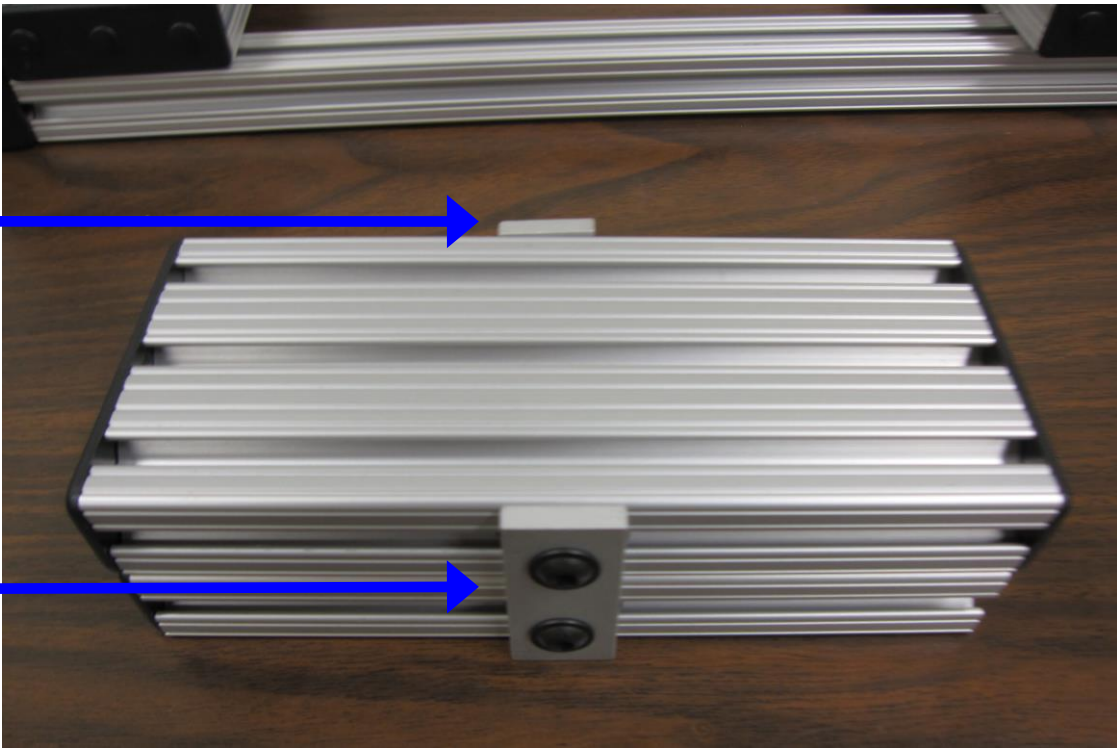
Aerial view of part “F3” labeling locations of the 2 Hole Joining strips and 1/4-20 x3/8 Flanged BHSCS screws & Economy T-nuts.
